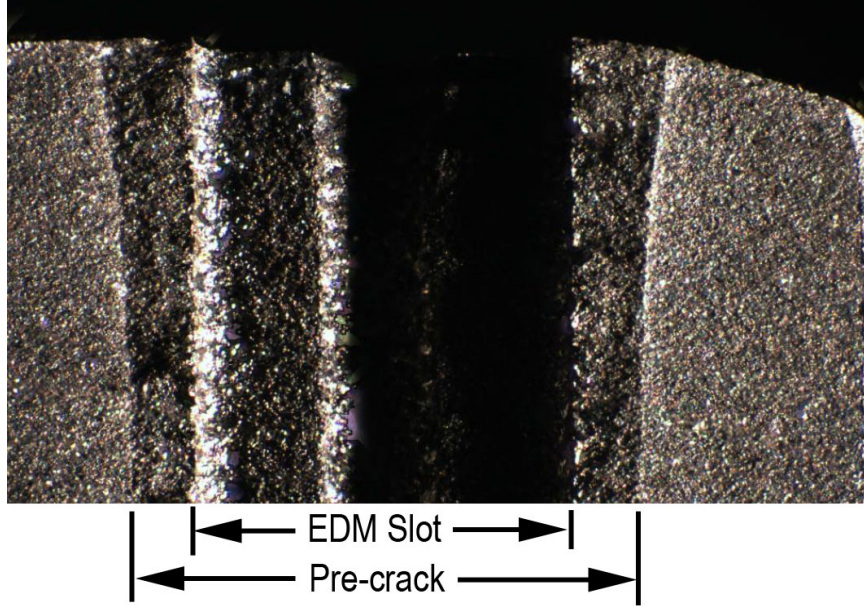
Bottom right fracture surface of ITCR #4 showing small initial crack deflections from the pre-crack (bright lines between the pre-crack and subsequent fatigue crack) highlighted by oblique lighting.
